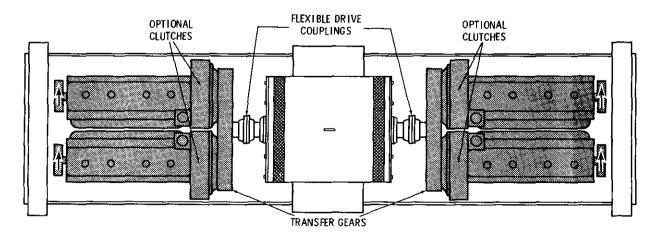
Typical Quad Engine Drive Arrangement—Two Bearing Generator
